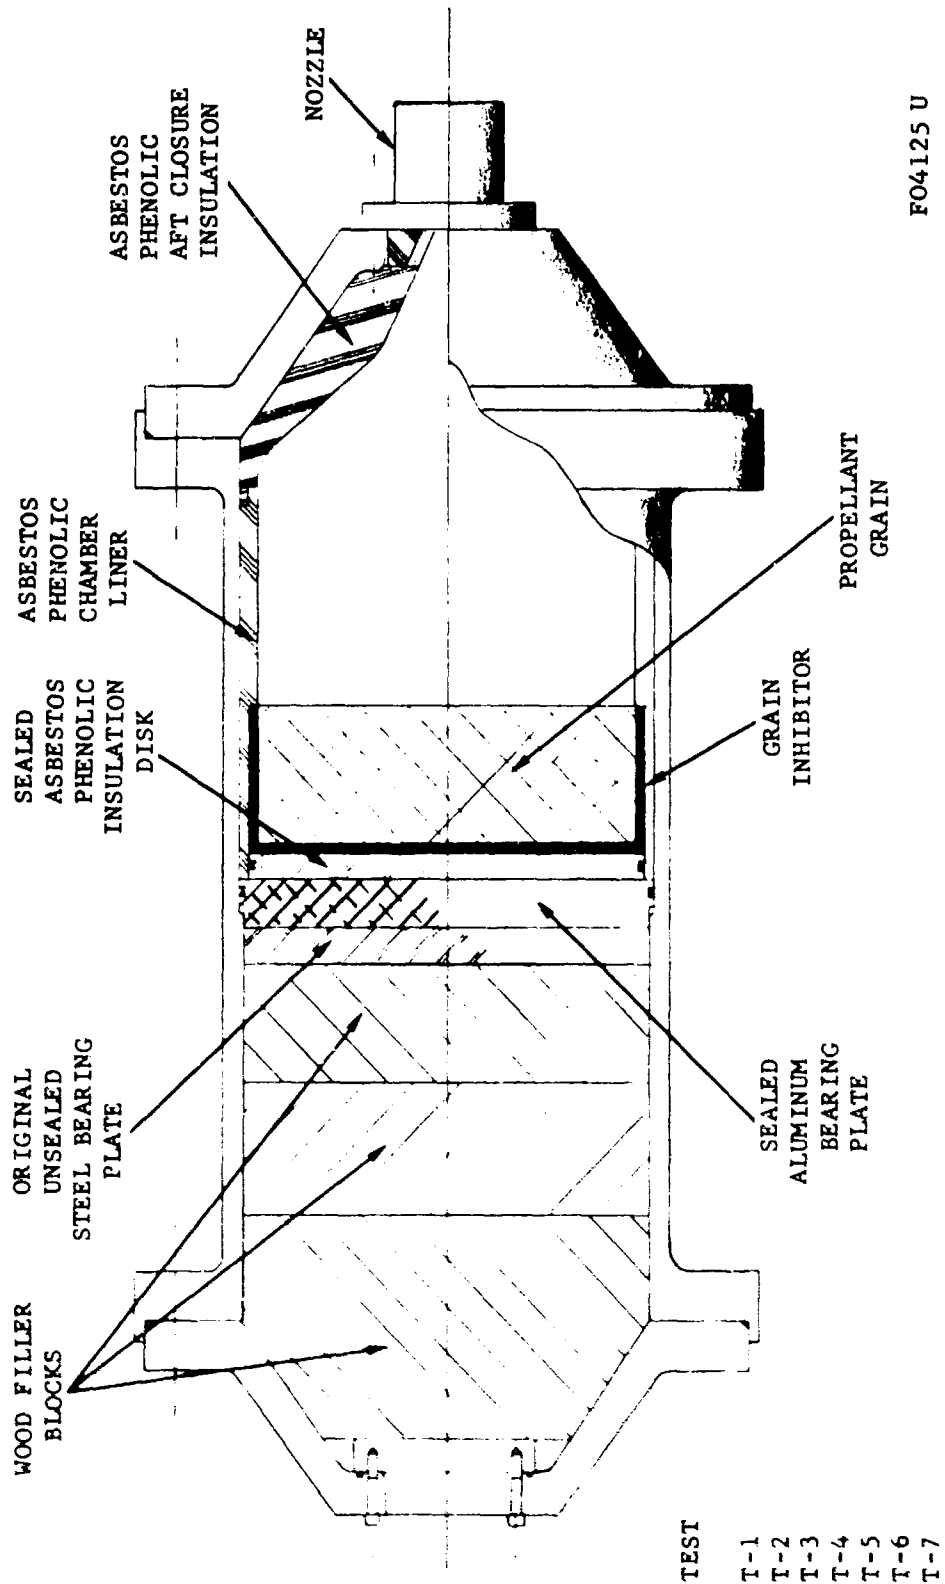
MODIFIED MOTOR CASE DESIGN - REMOTE END BURNING GRAINS
